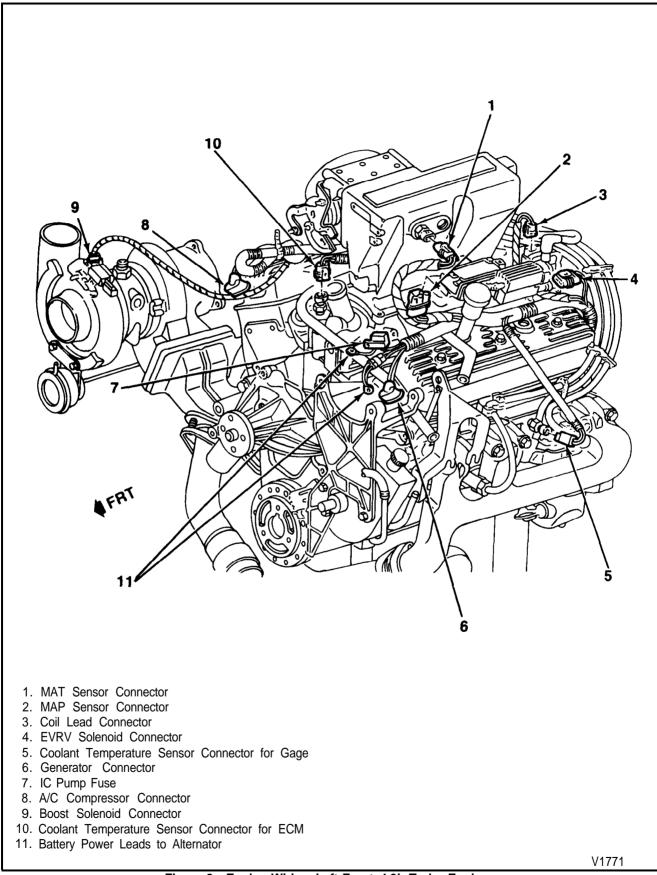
Engine Wiring-Left Front-4.3L Turbo Engine
